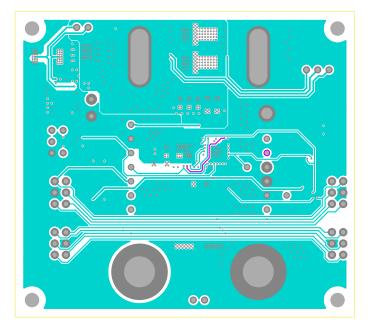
PCB - Inner Layer - Layer 3 (Top View)
